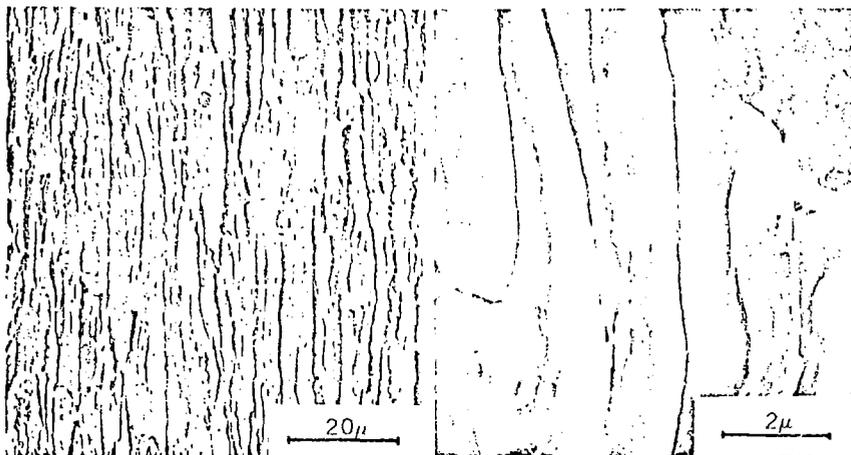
Fracture surface of ausformed and/or marformed material for longitudinal crack propagation.
